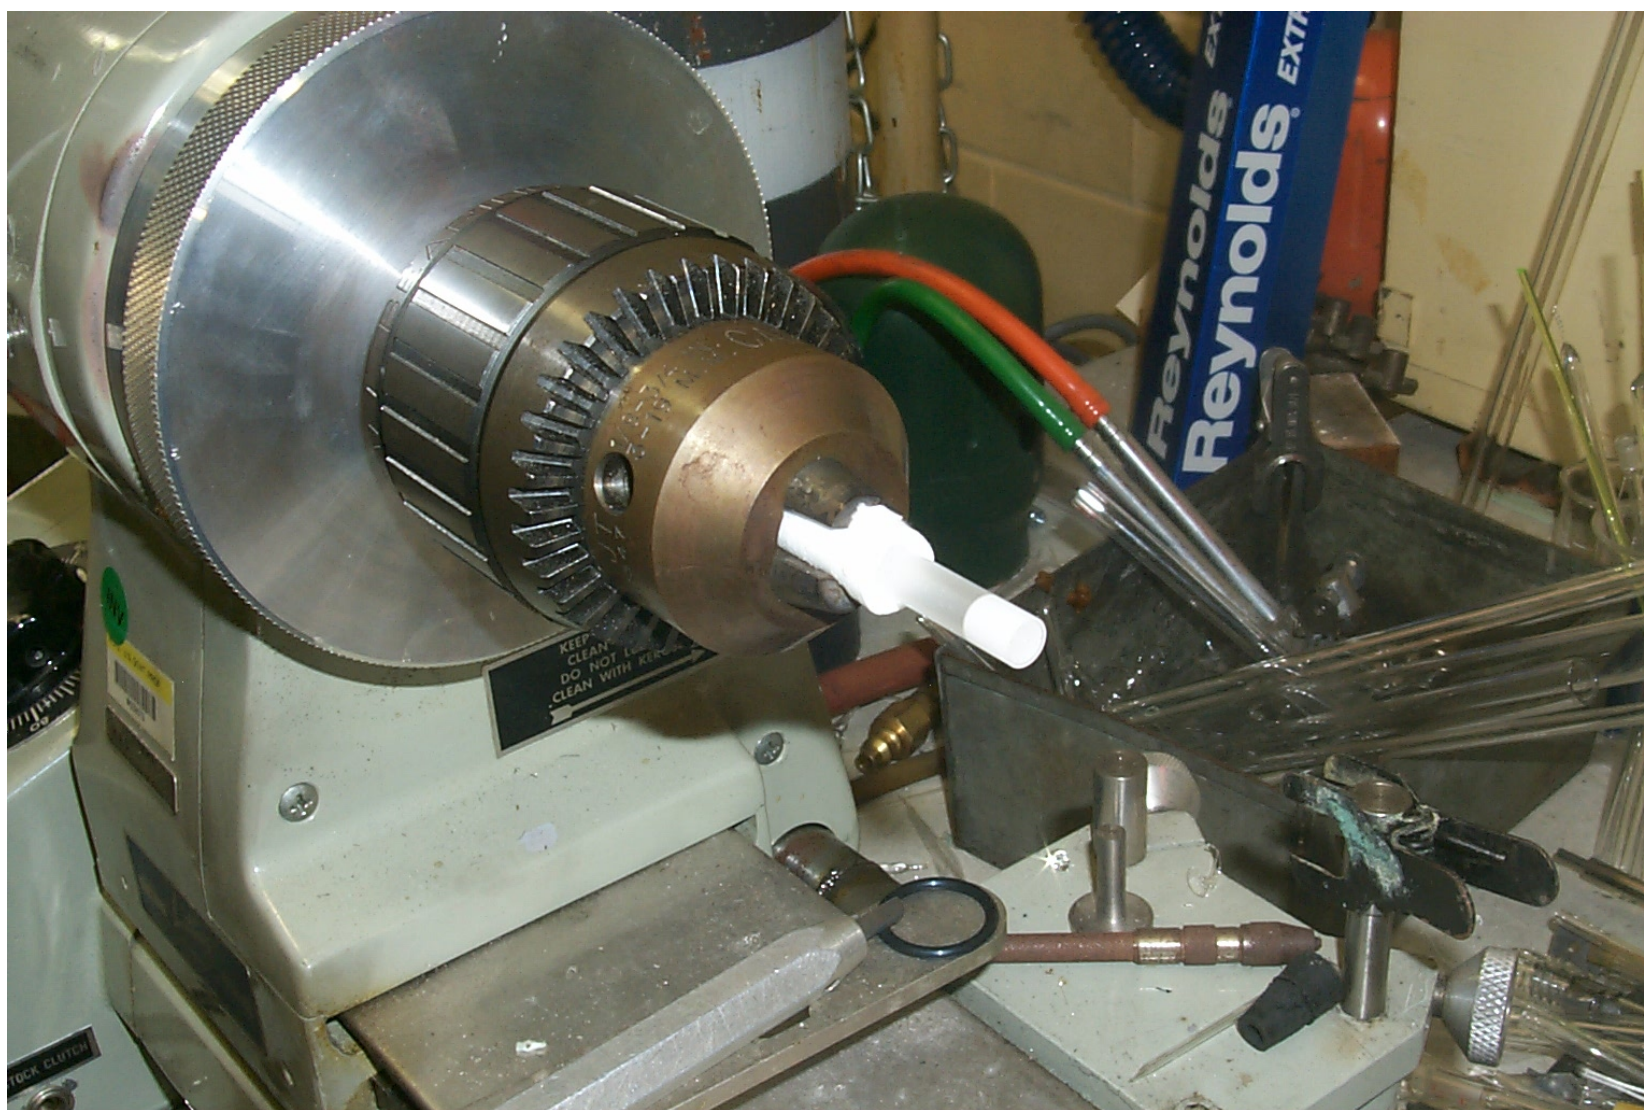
GPC body mounted in a glassblowing lathe. Assembly of a GPC begins with the sealing of the front plug to the end of the body with the short offset (see Figure 1, right end of body).
